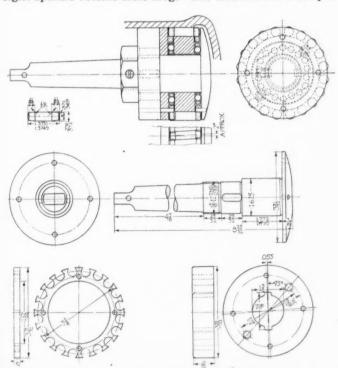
Drawings of tool used in burnishing the Mack truck engine cylinder
